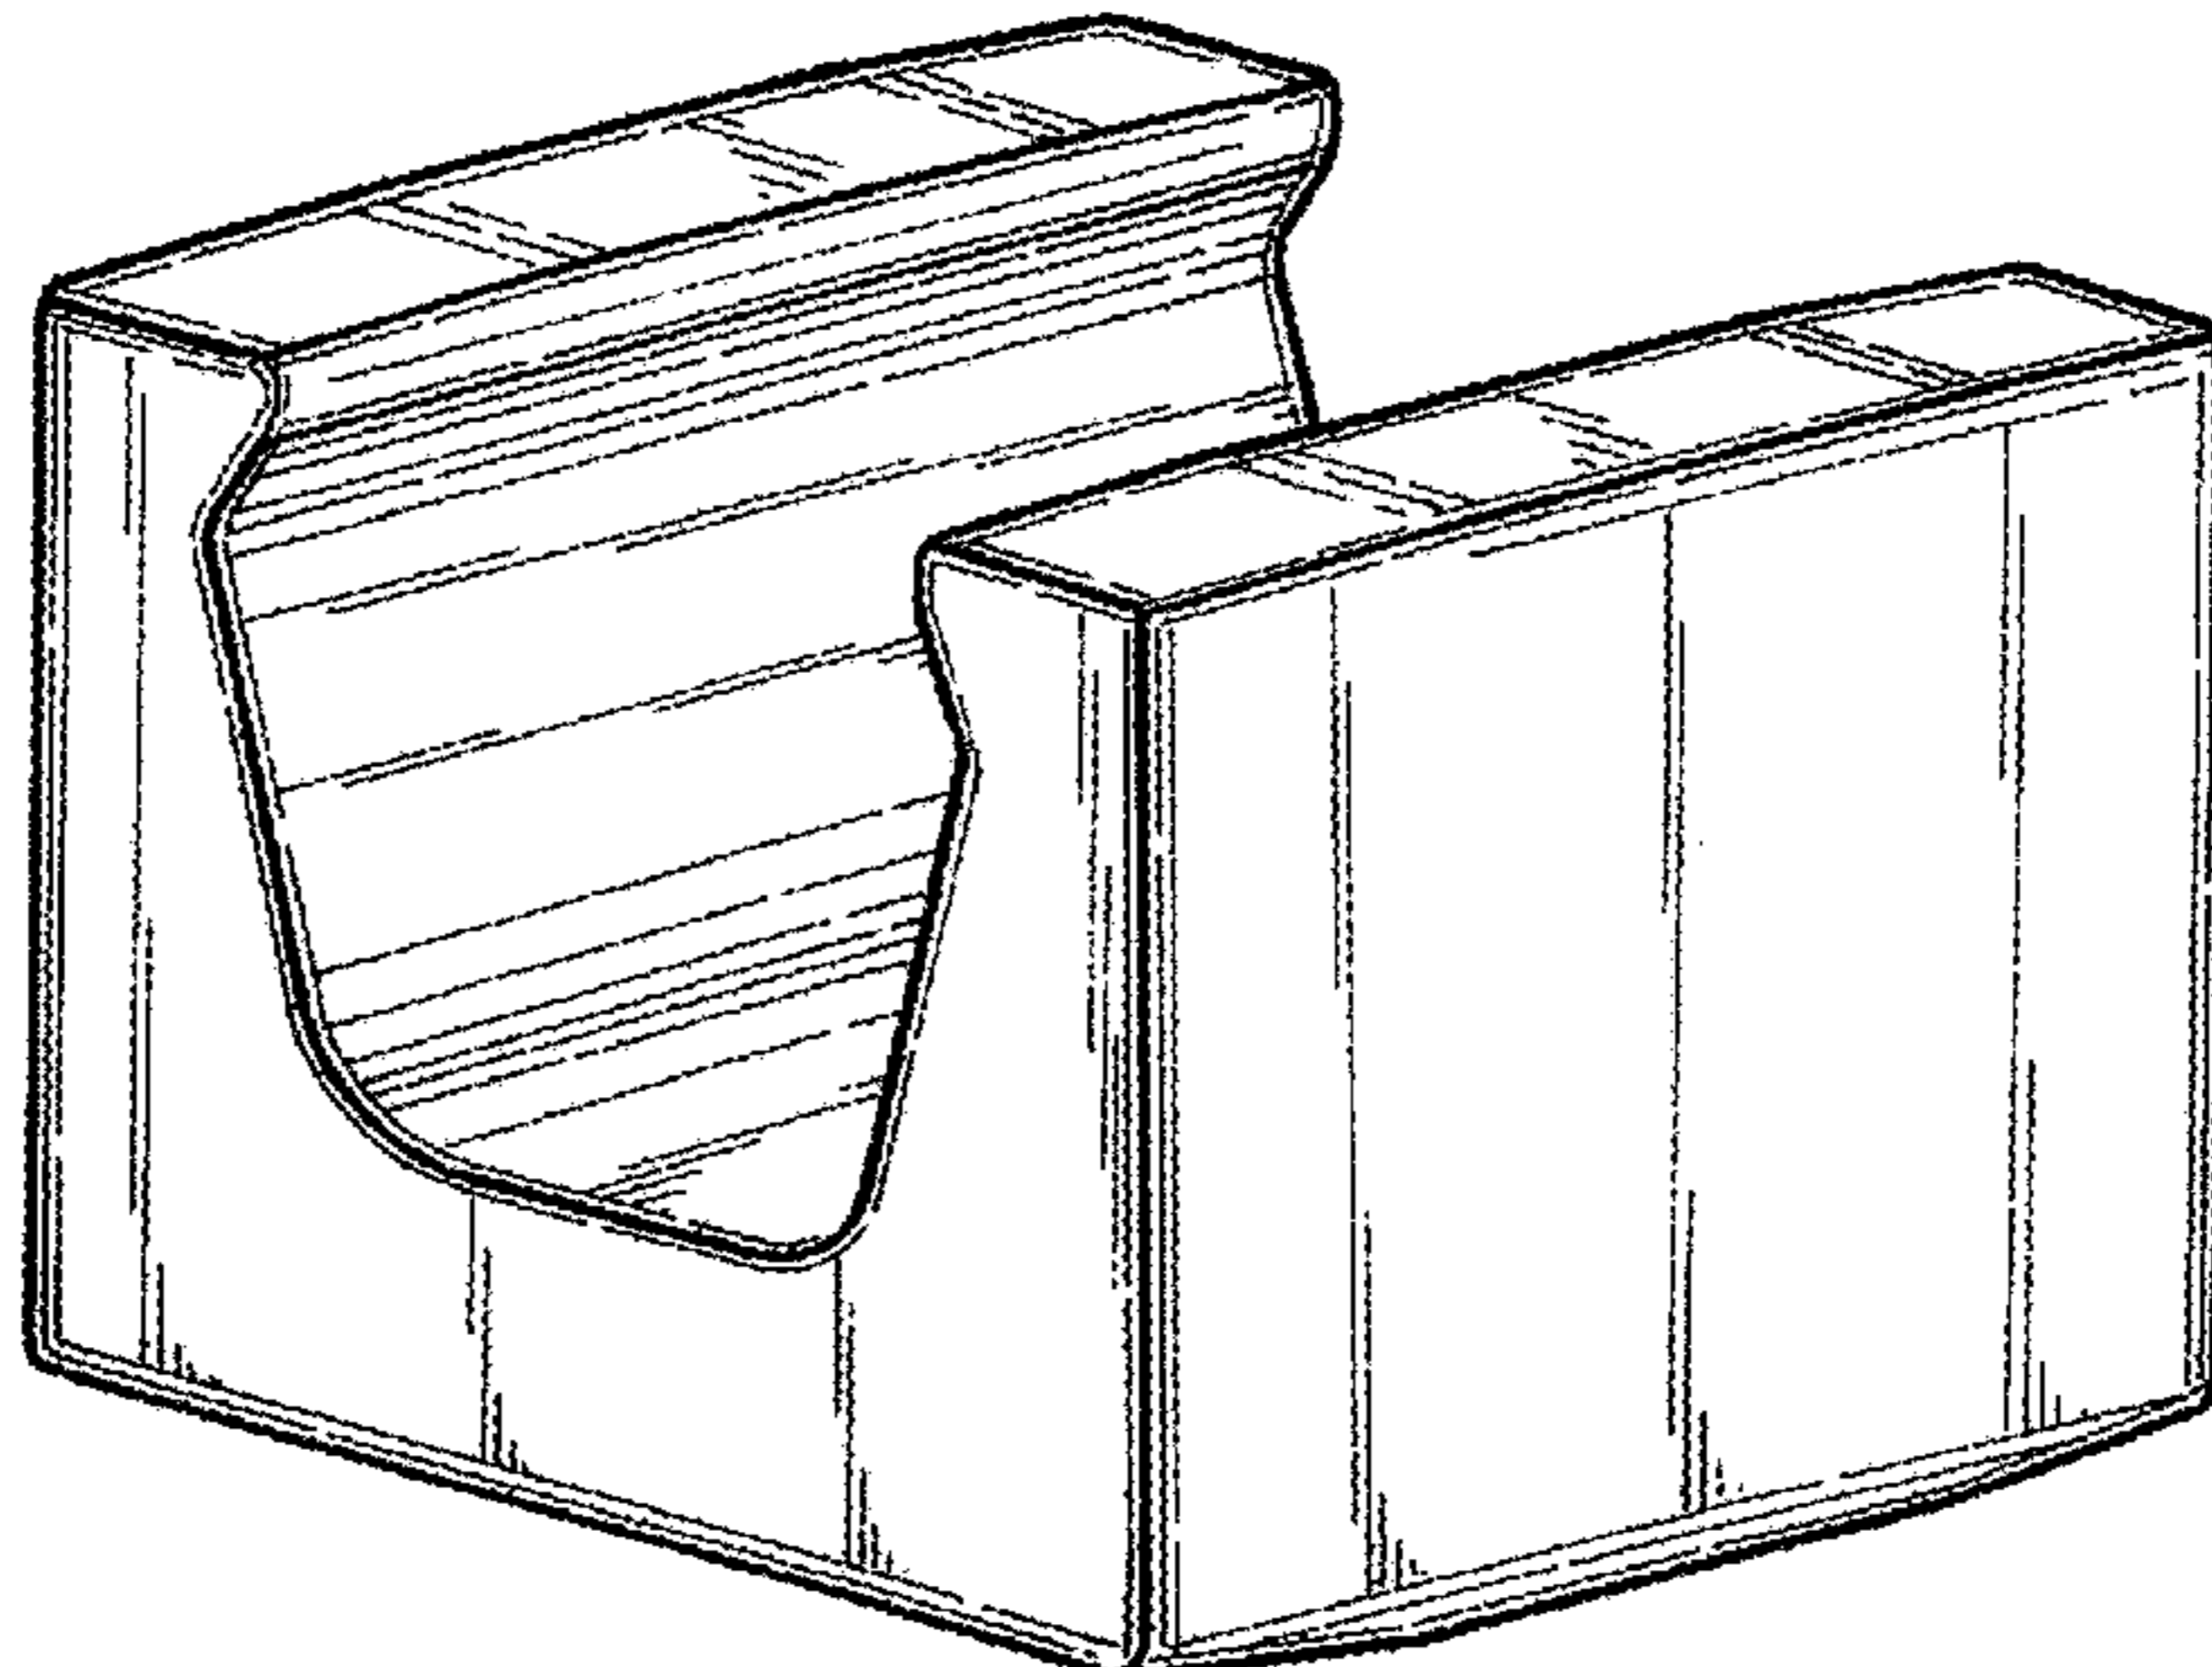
is a right side, top perspective view of one form of railcar cushioning assembly follower;
